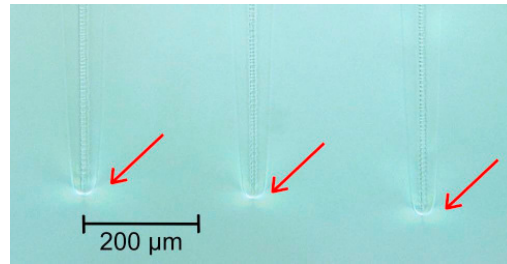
Top view of cracks formed at the beginning of the welding seam in D263 under the following conditions $NA = 0.55$, $P = 6$ W, $v = 20$ mm/s, $f = 1$ MHz
